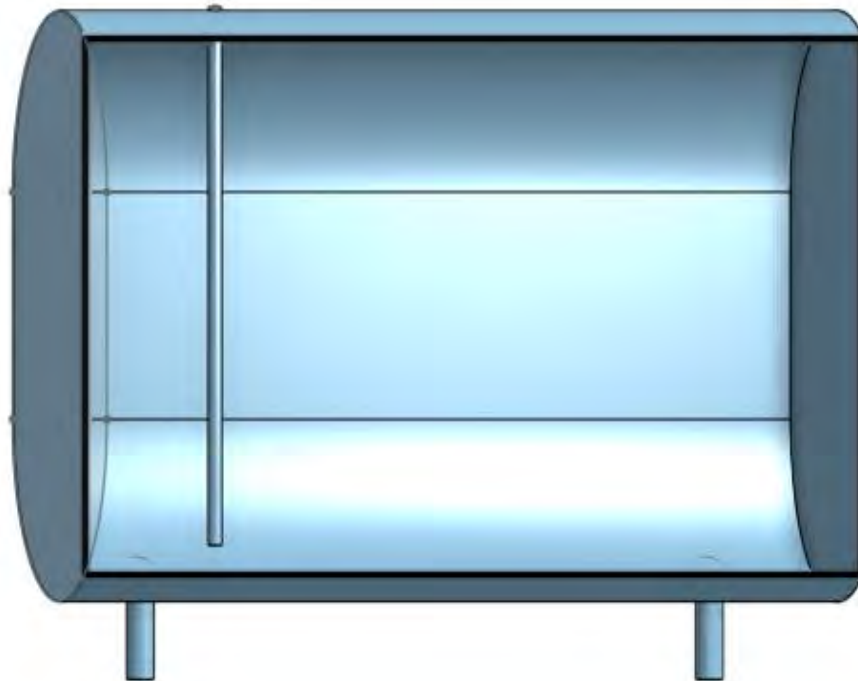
Cross-sectional drawing of tank to show in-tank vertical rod heater
